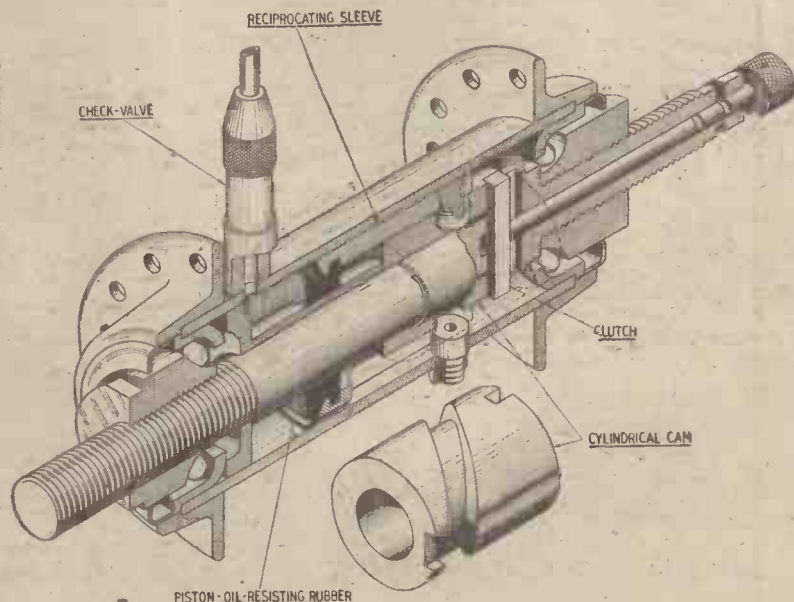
Sectional view of the "Cyclair" automatic cycle pump, and detail of operating cam.
